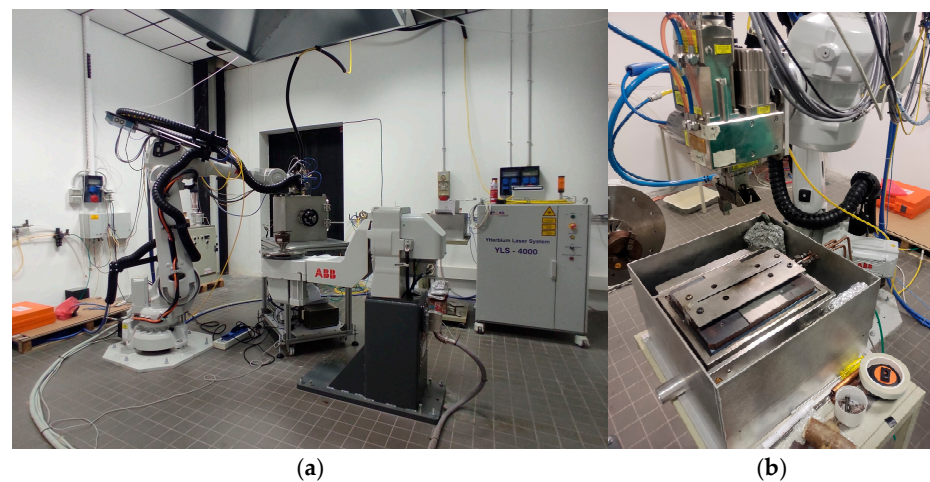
The ABB robotic arm that carries the laser focusing head (a) and the clamping (b).
